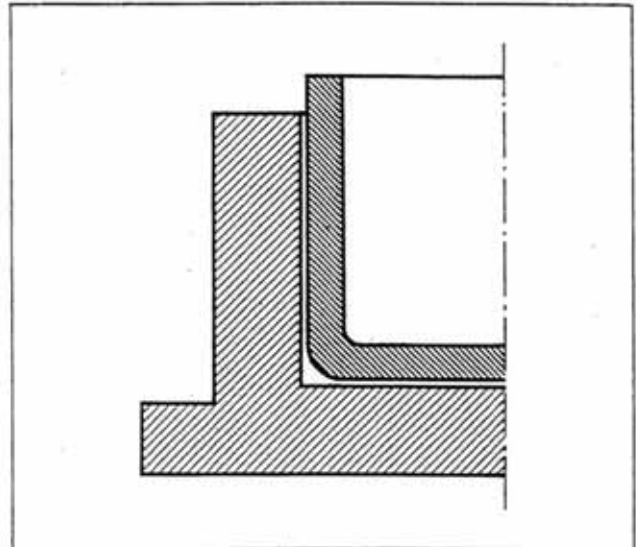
Supporting of the lower part of the moulding in the holding fixture
